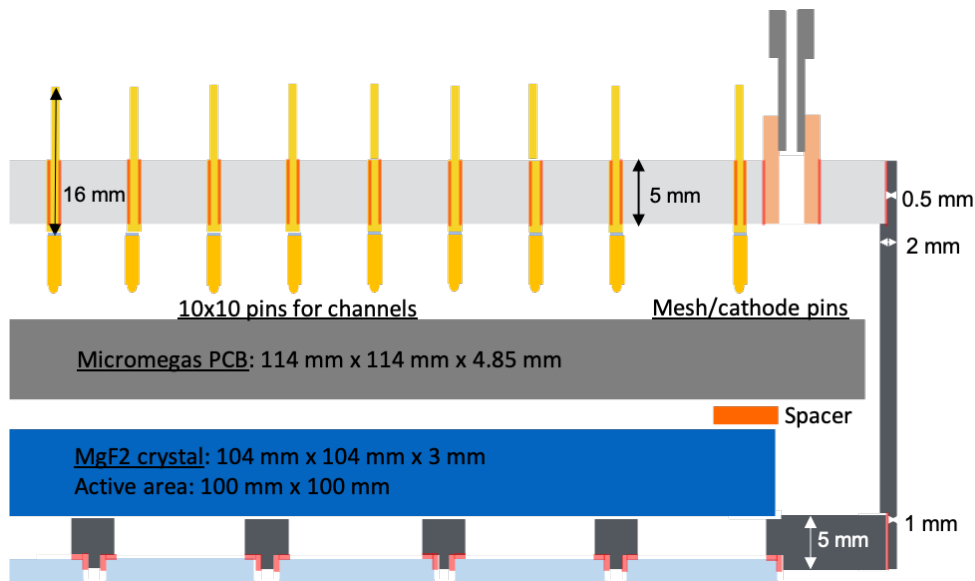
A cross section of the sealed housing. In this concept there are titanium housing parts, a ceramic board instead of the outer PCB and extra sapphire windows on the bottom.
